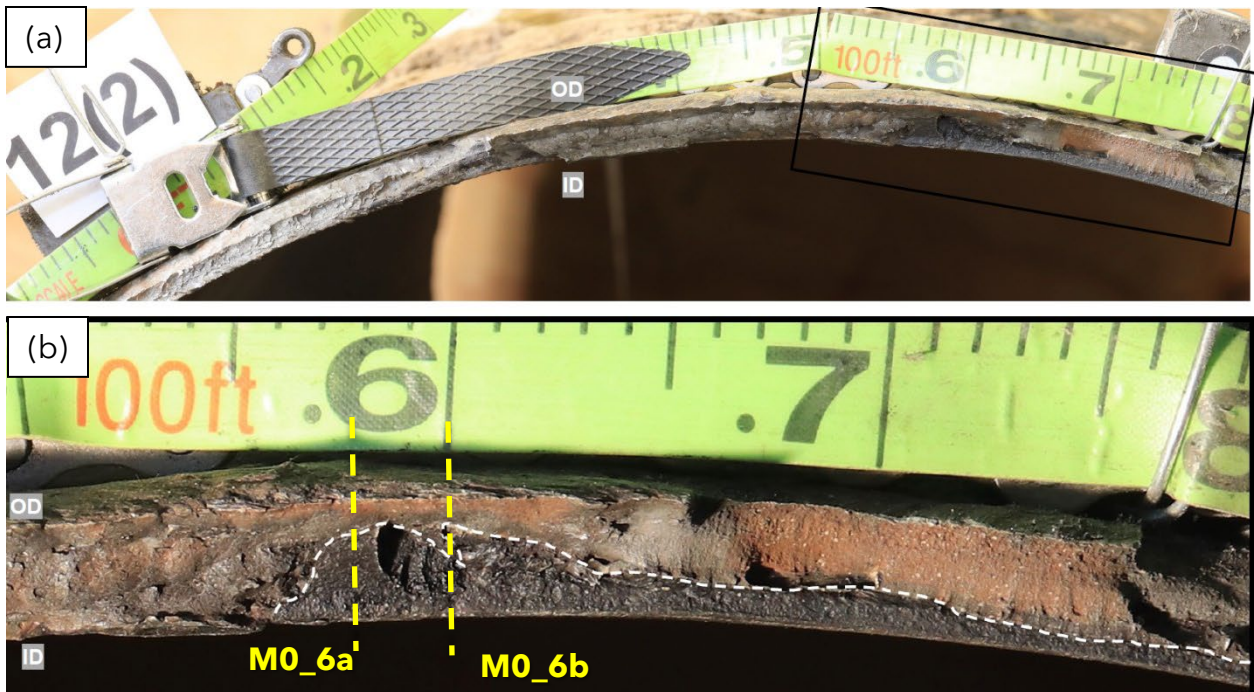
View of the Pipe 2 fracture surface (a) clockwise of the 12 o'clock position, post cleaning with (b) showing an inner diameter surface breaking feature, outlined by white dashed lines. Between 0.5 and 1.2 feet clockwise of TDC.
